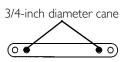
Installing Back Cane Hardware Assemblies - HWBAK Assemblies
